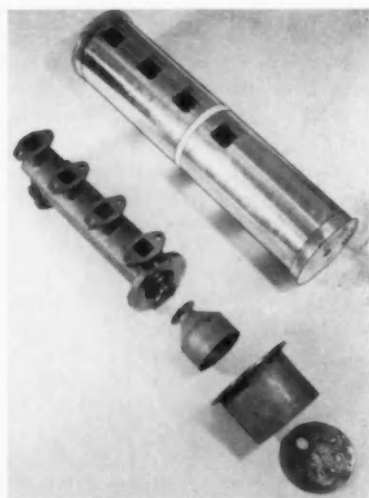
Exploded view of TRW afterburner, showing the exhaust manifold, combustion chamber, and end cover. Above these is the stainless steel enclosure with its blanket of insulating material.
